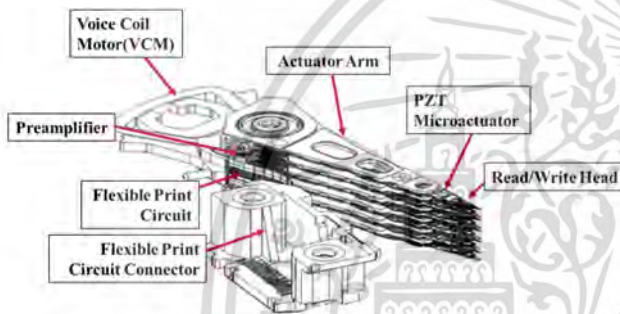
Head Stack Assembly (HSA). Shown in this figure is composed of ten heads, thus ten PZT microactuators to operate with a stack of five disks
